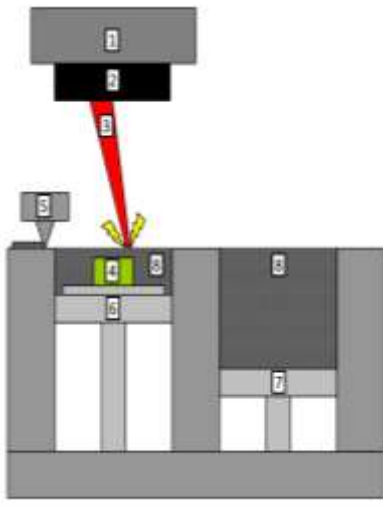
Concept of the LPBF technology used: 1- laser scanner, 2- laser optics, 3- laser beam, 4- part, 5- coater, 6- building envelope, 7- powder bunker, 8- powder.
